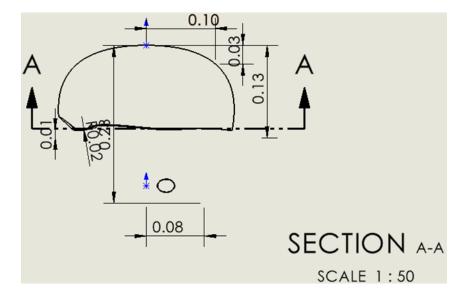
Dimensions of the CAD model of the helmet shell (Side View)
